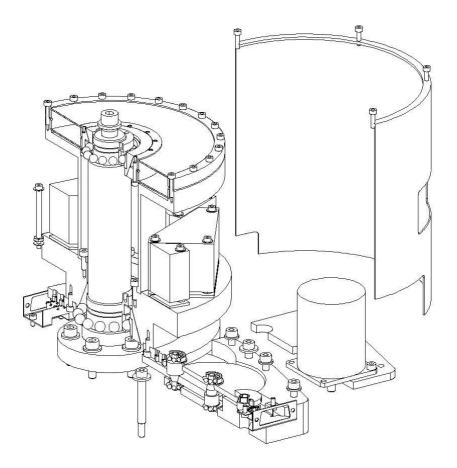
Cross-sectional view of the grating turret and drive system showing internal components.
